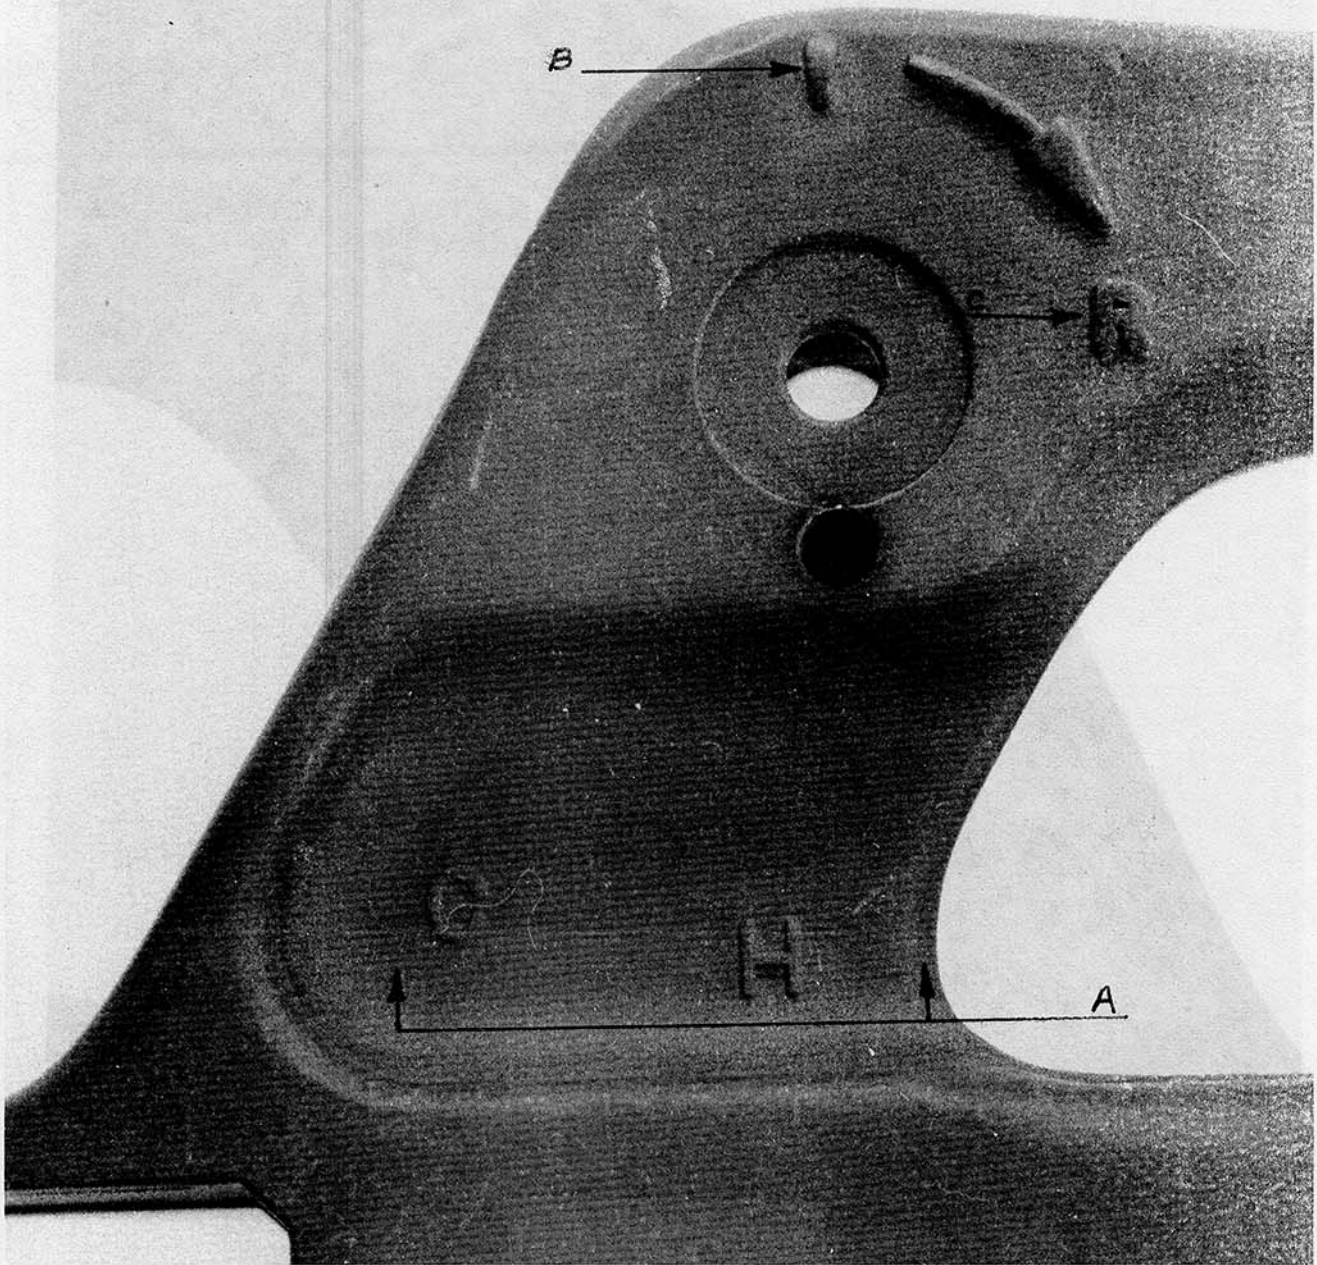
Upper receiver (US supply part - "CH" manufacturer mark).
